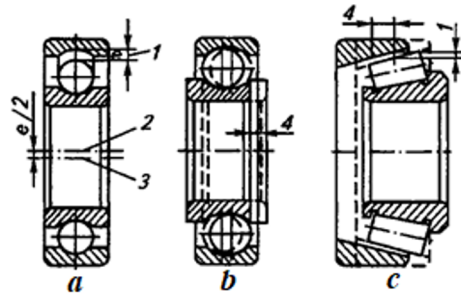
Radial (a and c) and axial (b and c) clearances in the bearing: 1 - radial clearance; 2 and 3 - the axis of the outer and inner rings; 4 - axial clearance
